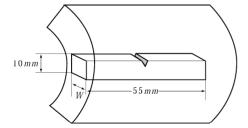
The position of selection for impact test specimen taken from the seamless steel pipes and other portions than weld zone of electric-resistance welded steel pipes
